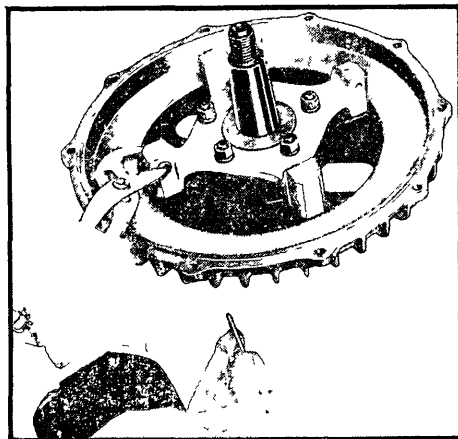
Installing buffer lock pin. Chrysler rear disc brake
